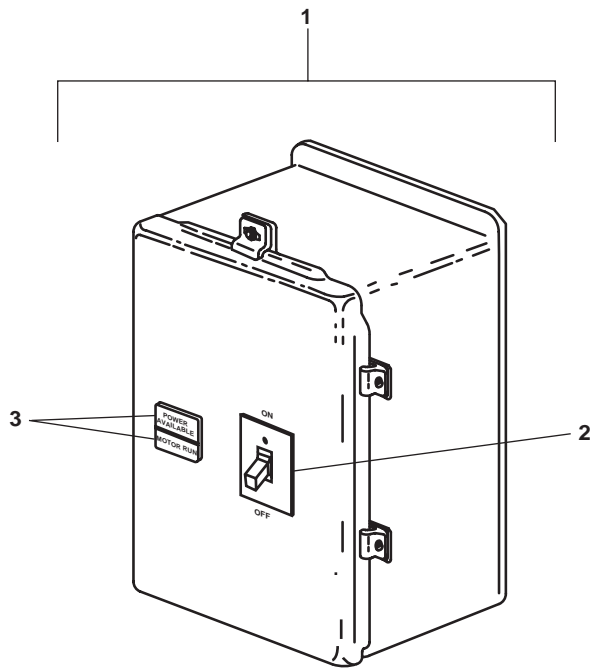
Weld Hood Exhaust Fan Motor Controller
